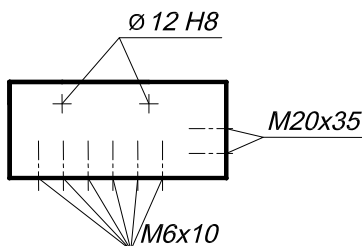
Conventional dimensioning of bore-hole and threaded bore-hole with counterbore
